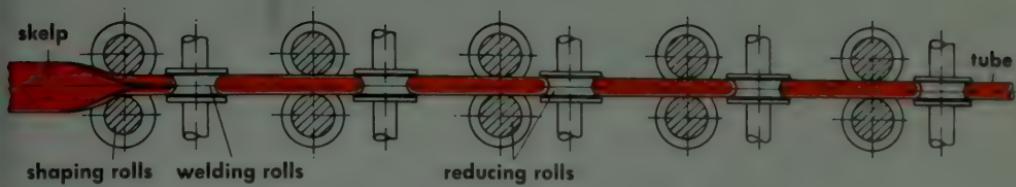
FRETZ-MOON PROCESS FOR WELDED TUBE MANUFACTURE
